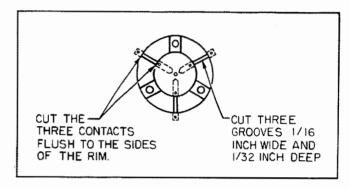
B. Method of Reworking Contact Assembly (Part No. 234843)
